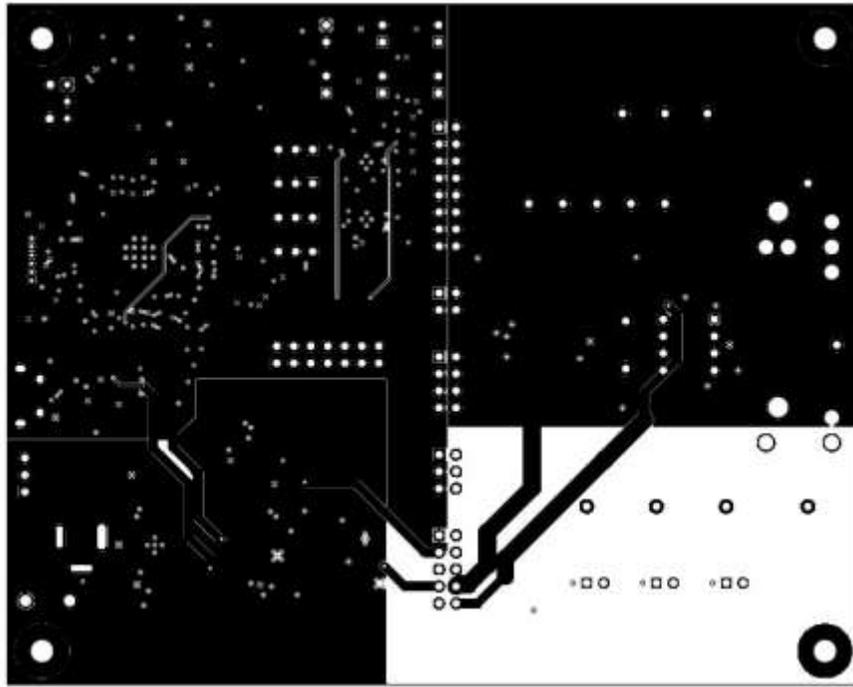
PCM175xEVM PCB Mid-Layer 2 Layout
